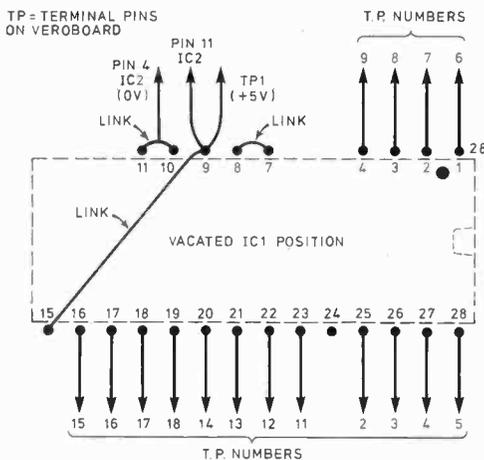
After the calculator chip (IC1) has been removed from the Cambridge, terminal pins should be inserted through the lead holes. The vacated i.c. pad can then be wired as shown in the diagram
